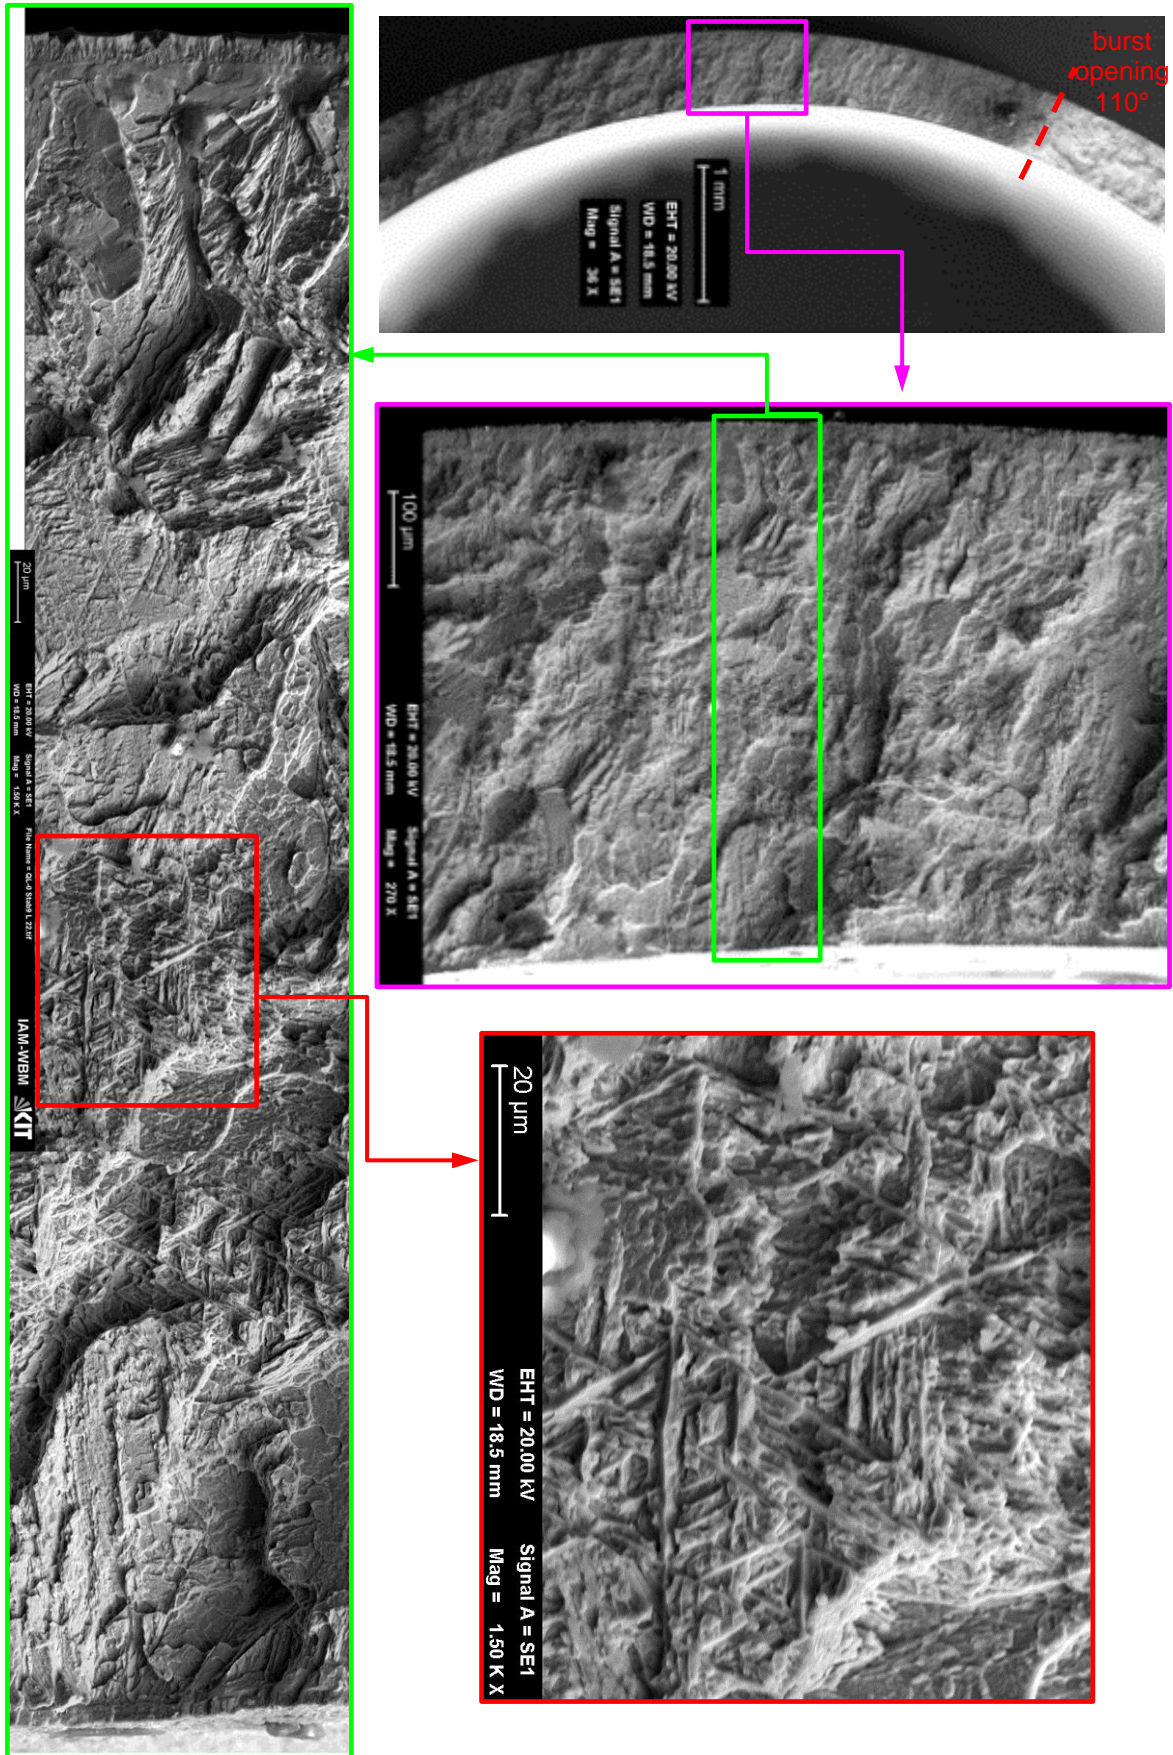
QUENCH-L4; SEM image of fractured surface of rod #9 at angle 90° after tensile test; top view. Brittle fracture.
